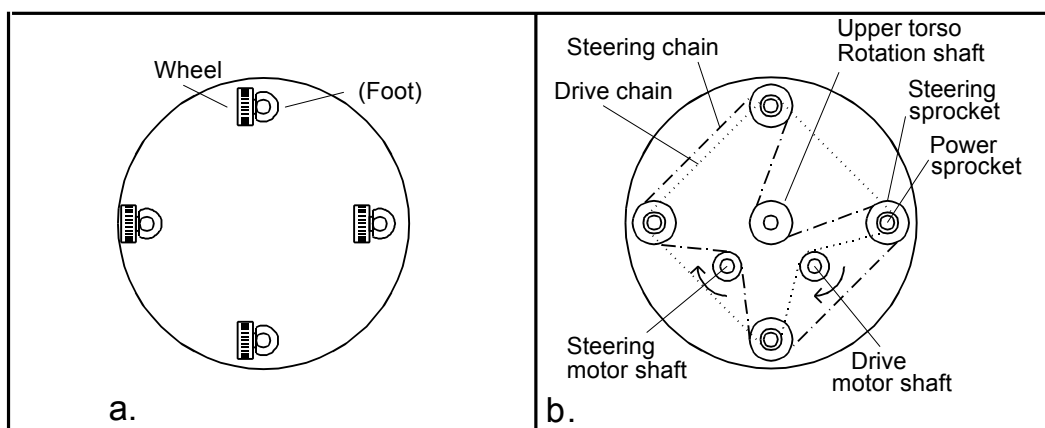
A four-wheel synchro-drive configuration: a. Bottom view. b. Top view.
